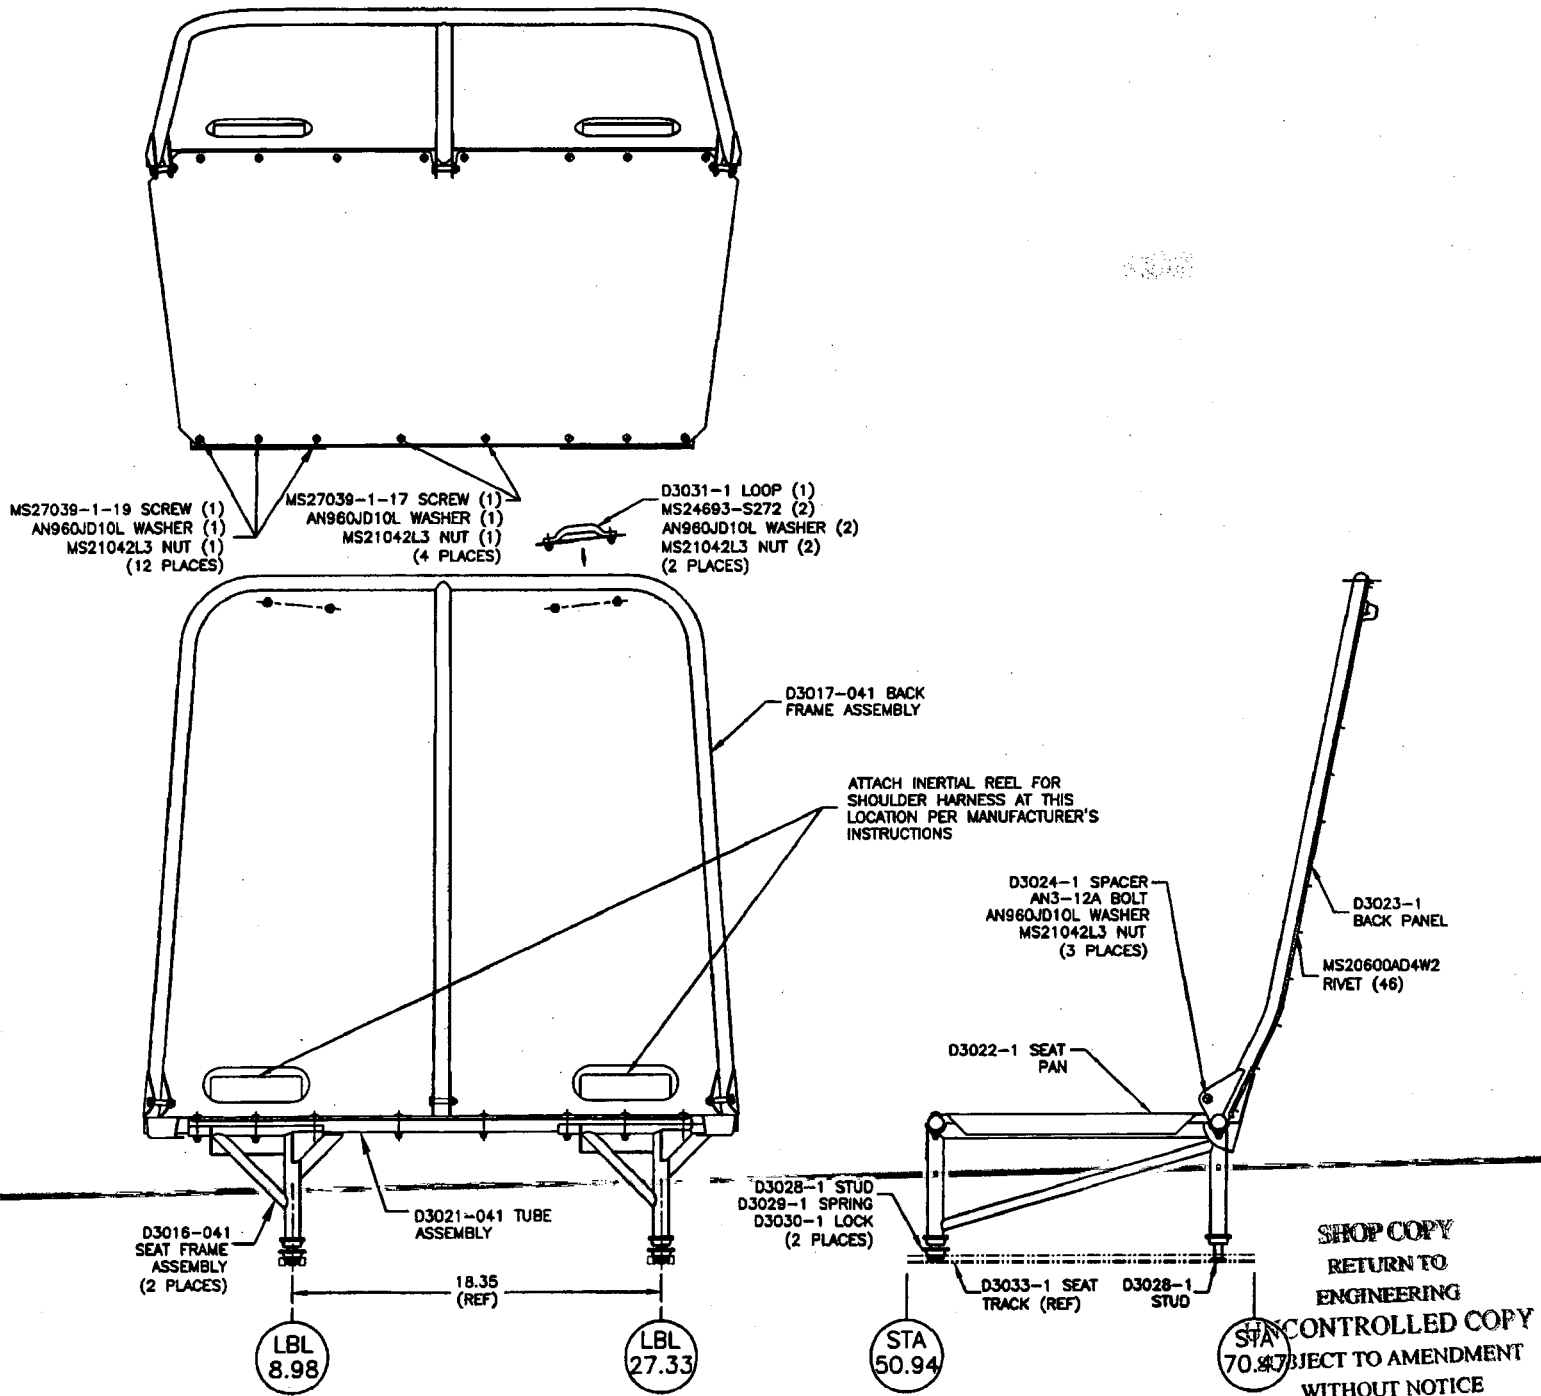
Installation of D350-689-041 Dual High Back Seat Assembly
